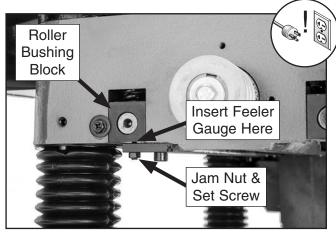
Example of feeler gauge location for adjusting infeed roller height when using wood blocks (one of two locations shown).
